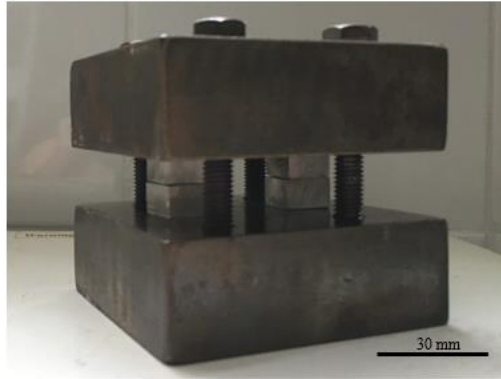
2. Stainless steel die assembly used to apply pressure for diffusion bonding.
